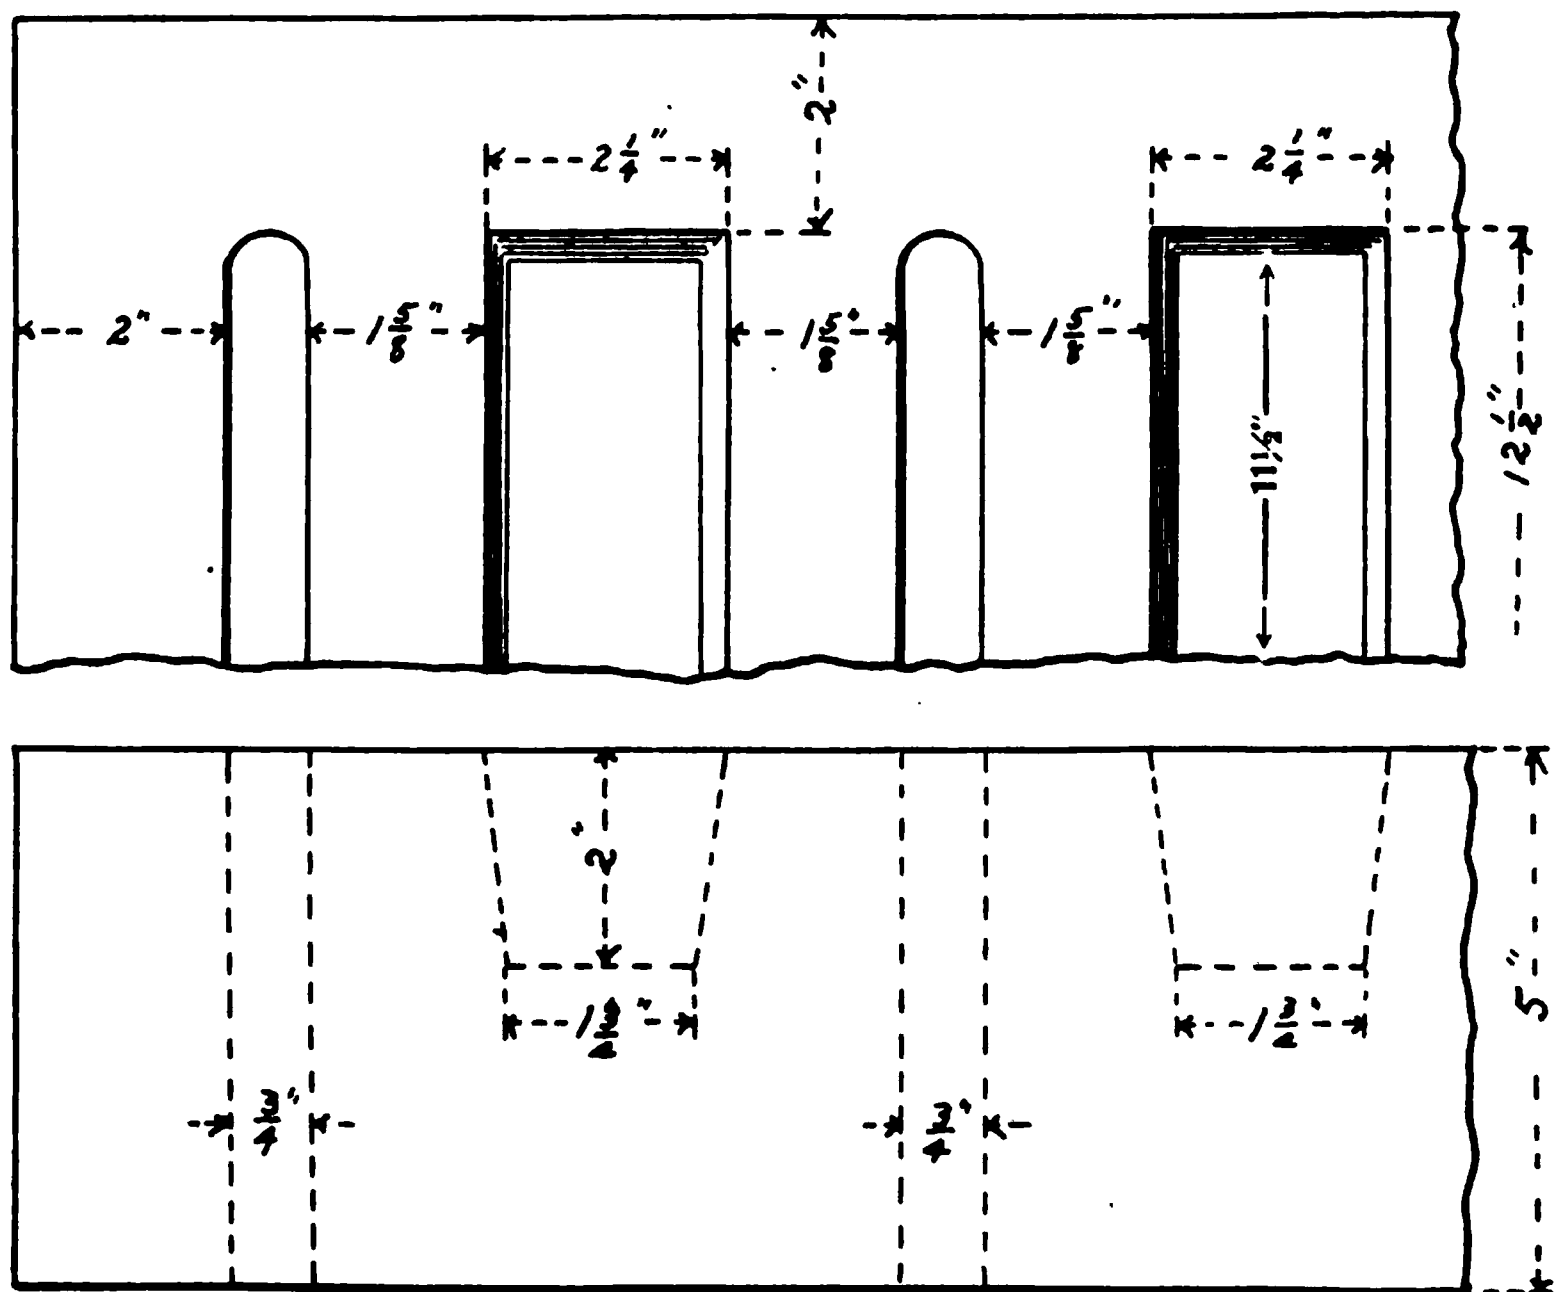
MOLD FOR CHILL TEST SPECIMEN.
